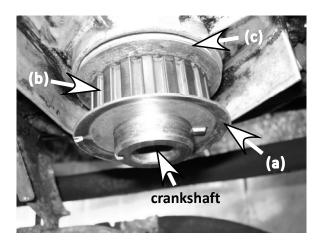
The crankshaft pulley should already have been removed. Now, slide off the front crankshaft shim [arrow (a), which has two notches, one on the outer circumference for marking Top Dead Center (TDC) and one on the inner circumference for locking onto the knob of the crankshaft pulley boss (b)]. The rear crankshaft shim (c) does not lock onto anything. Note that for both shims, the concave sides face away from the timing belt. All three pieces should slide off the crankshaft easily. (Well, you might have to pry the pulley boss off gently with small flatbladed screwdriver.)
